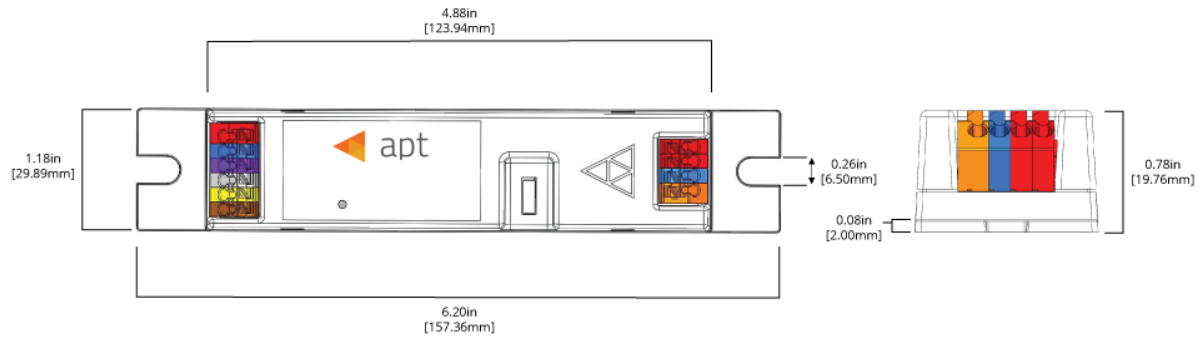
APT-CV2-Vx-LN Mechanical Drawing
